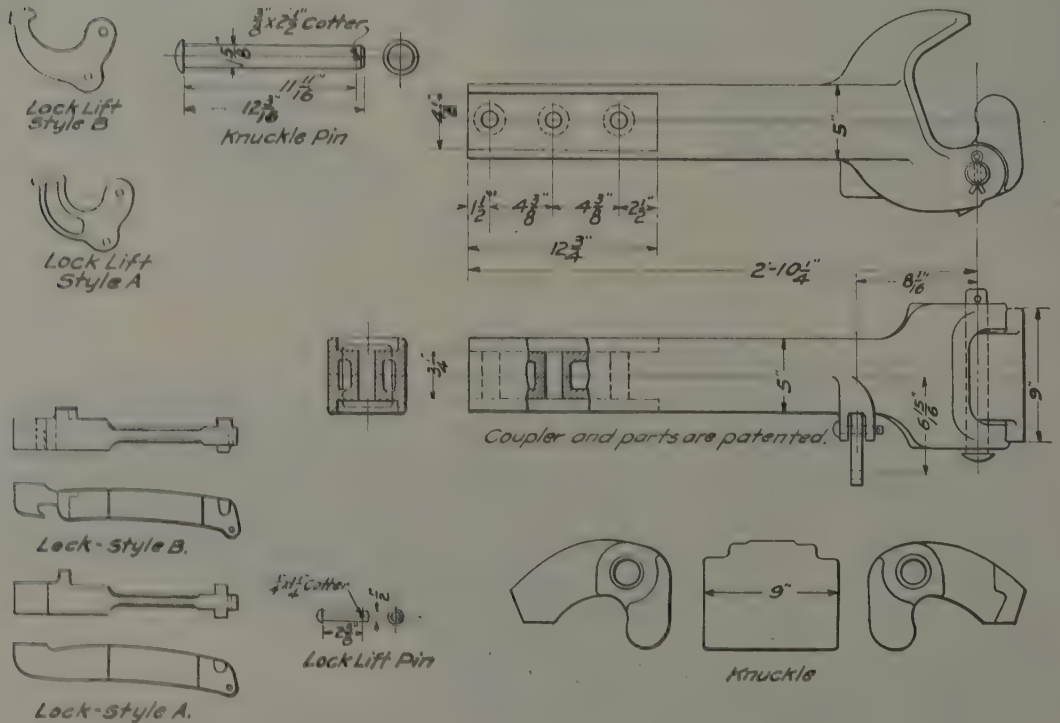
Chicago Passenger Coupler and Parts. National Malleable Castings Company.
